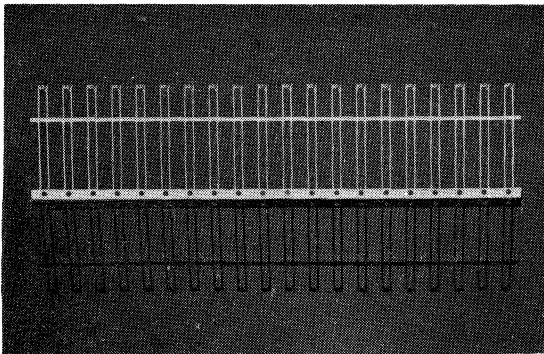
B. Detail Enlargement of LED Chip Mounting Area
